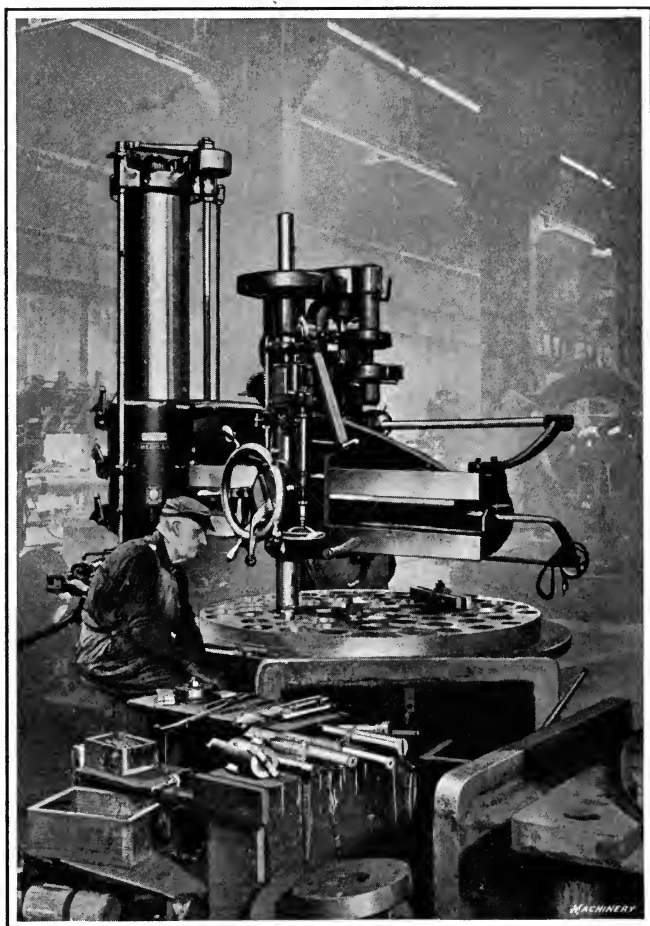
Radial Drilling Machine engaged in machining Air-head of Blowing Engine
